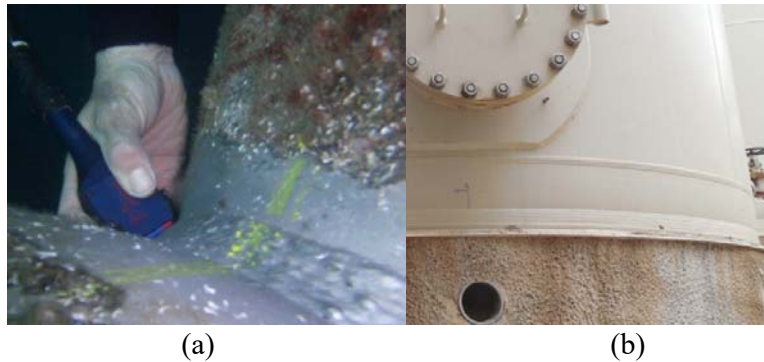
(a) Underwater weld inspection with ACFMT, (b) Weld inspection above paint with ACFMT
